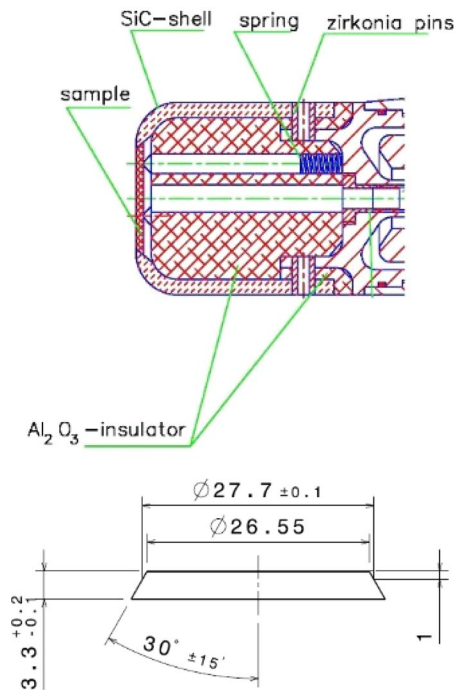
Schematic of L2K test assembly and sample geometry (dimensions in mm)
